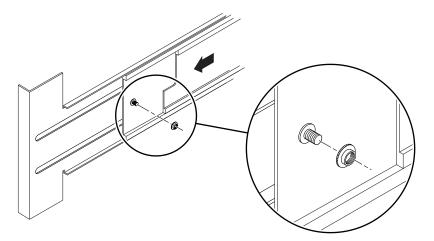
Inserting and Tightening the Slide Rail Spacers
